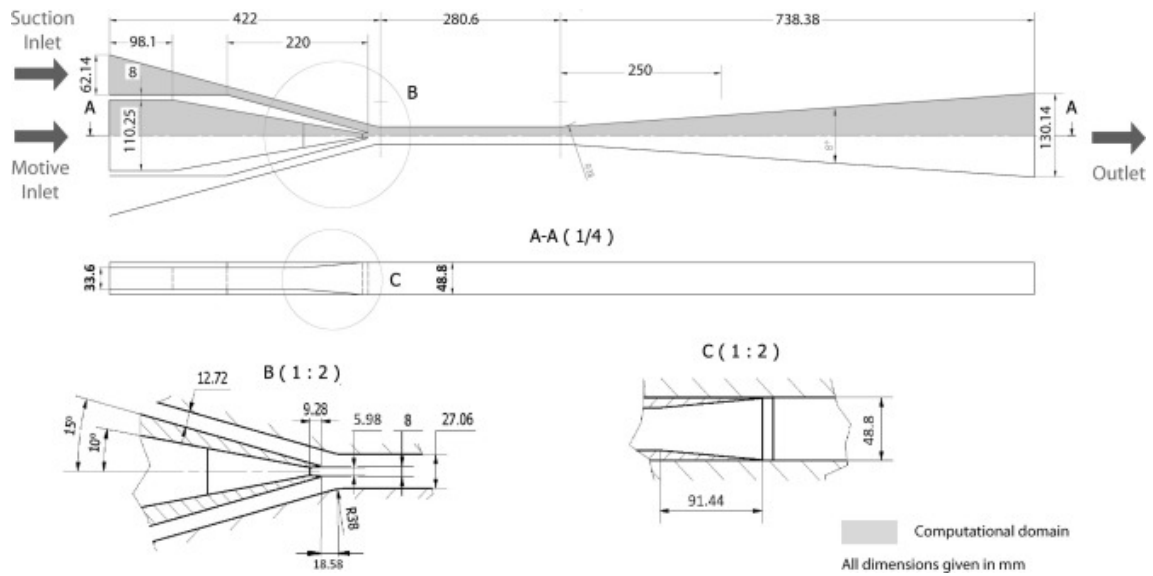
Dimensioned drawing of ejector used for experiments [37]. All dimensions are in mm.
